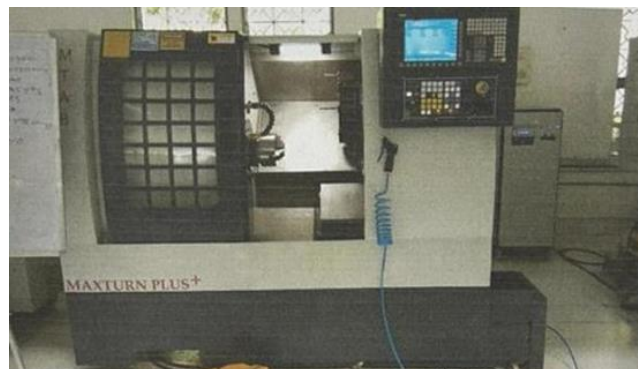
CNC lathe machine with ATC (Automatic Tool Change)
